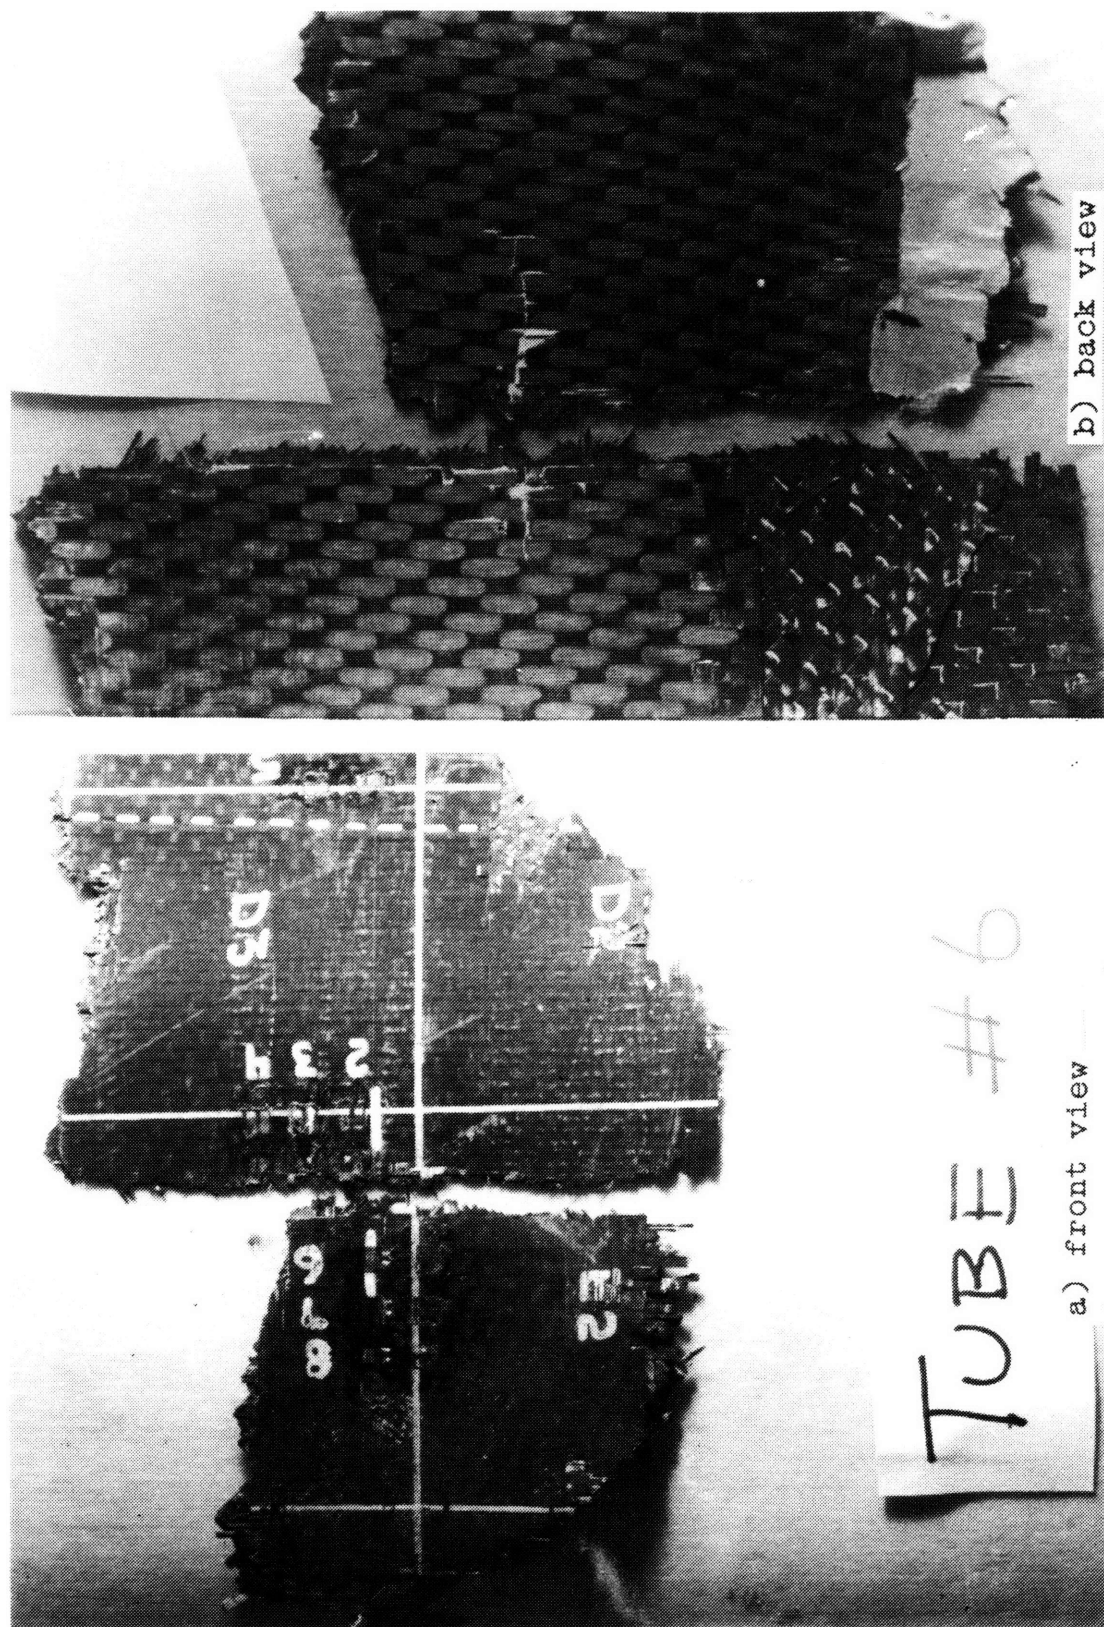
Photograph of Tube 6 Failure through Impact Section - a) Front View and b) Back View
